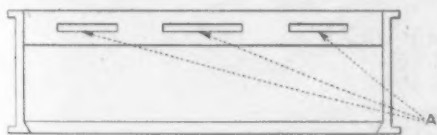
Arrangement for Using Bars Instead of Bottom Boards
